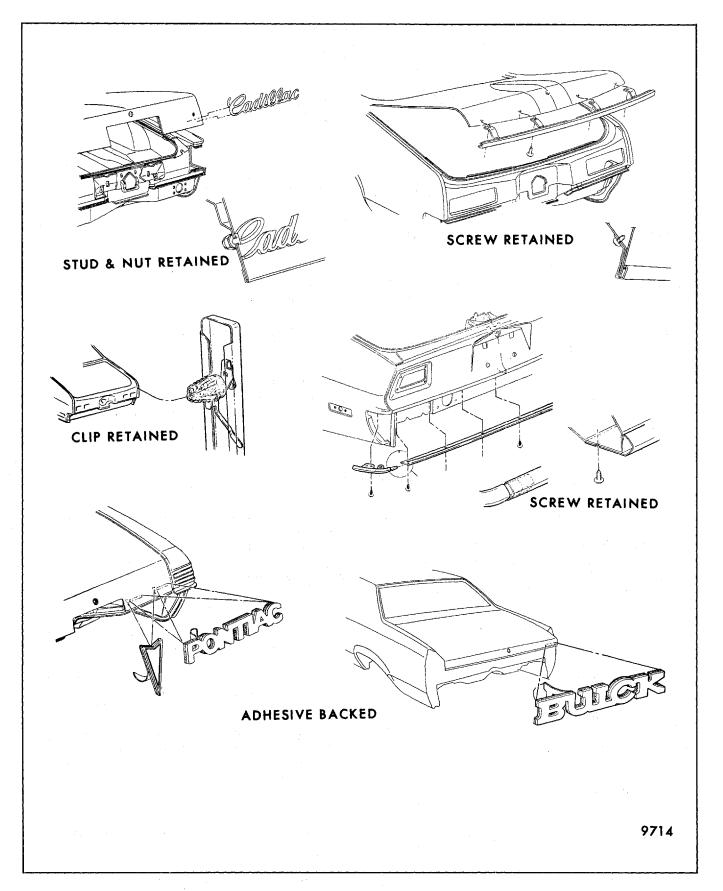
Molding, Name Plate, Emblem Retention
